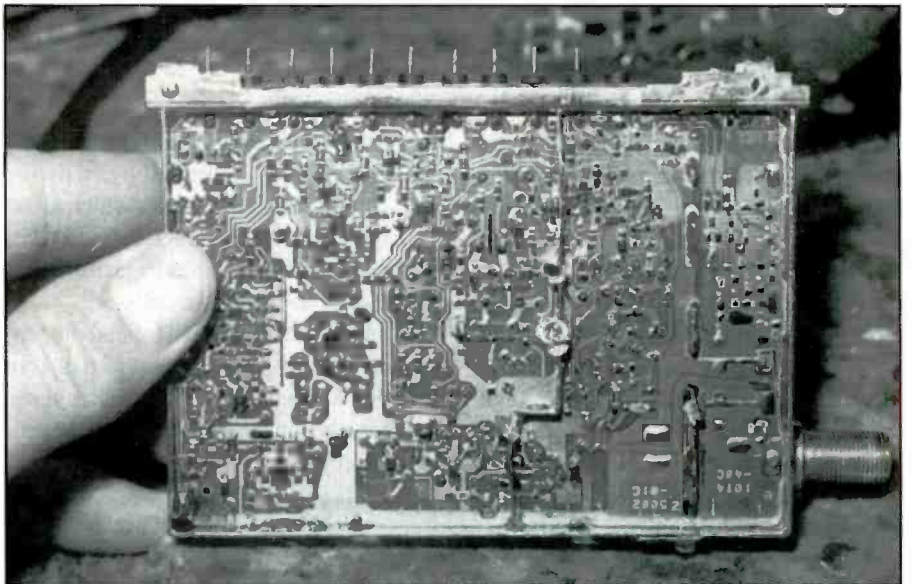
Surface mounted devices (SMD) are located on the pc foil side of the small U/V tuner. Larger, through-hole components are mounted on the other side of the board.
